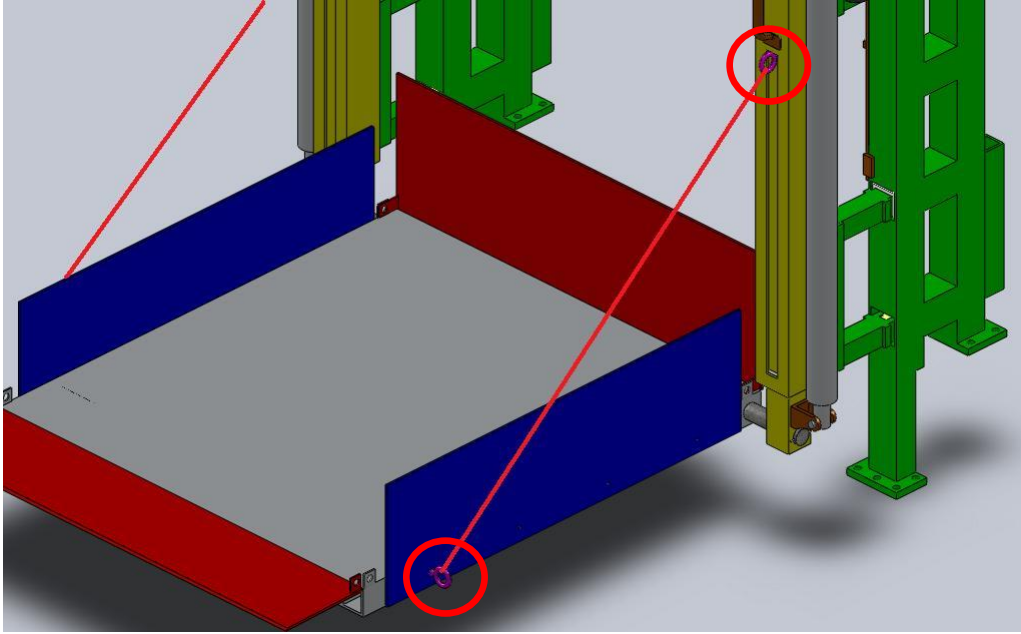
Hinges that Connect Bottom Bridge to Platform
